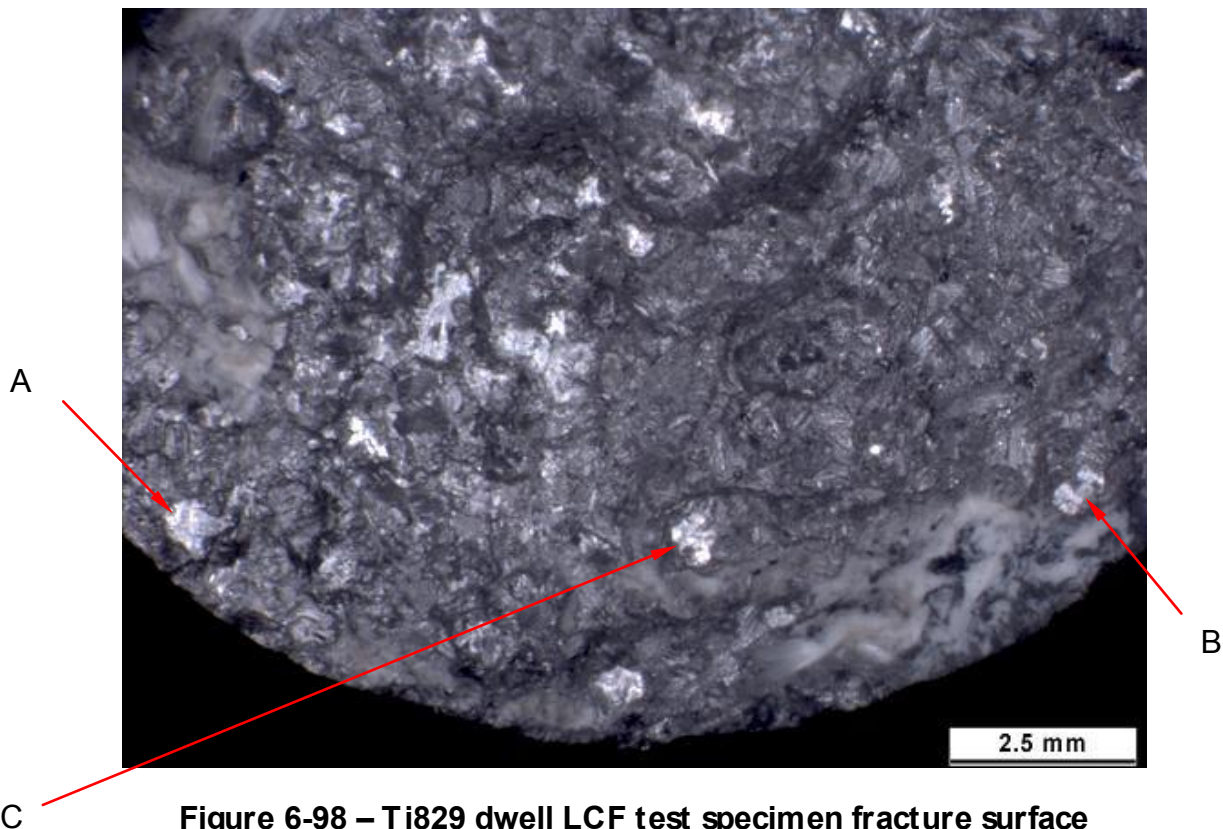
Ti829 dwell LCF test specimen fracture surface
